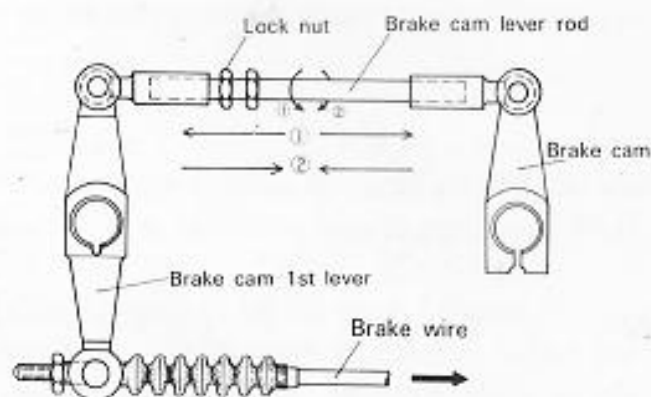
Adjusting front brake cam lever connecting rod
